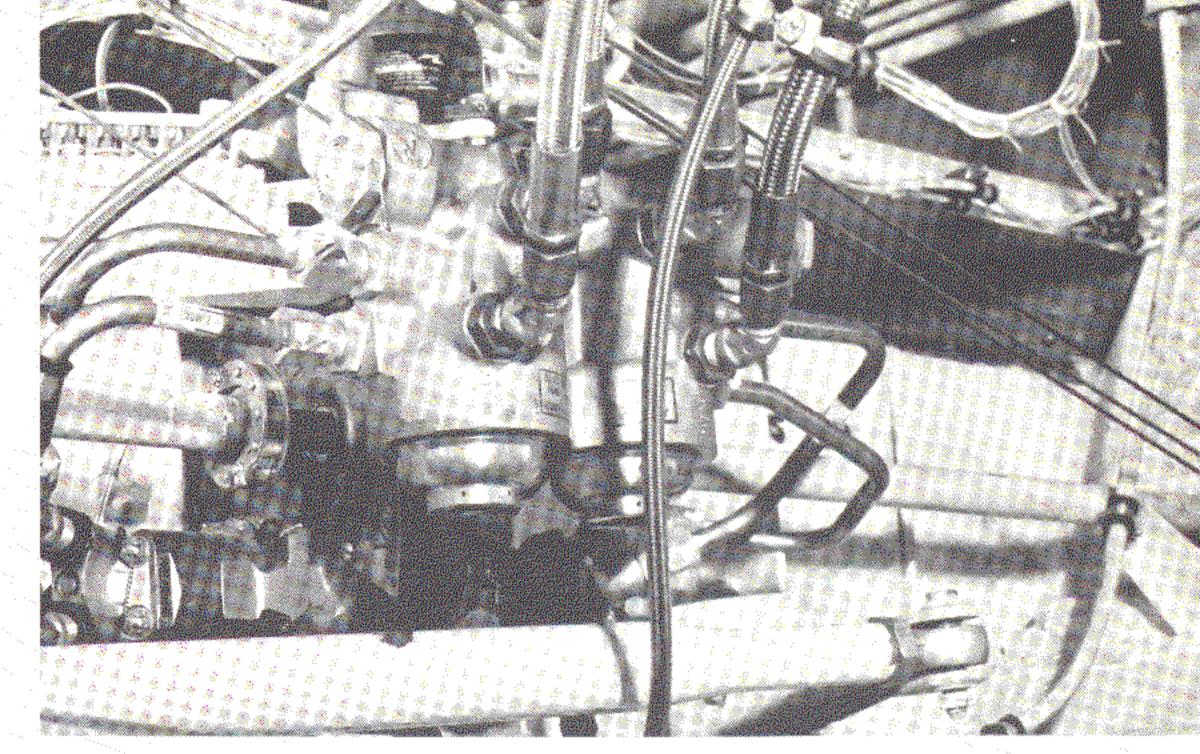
Wing Flap Drive Unit Installation in the Hydraulic Service Center
